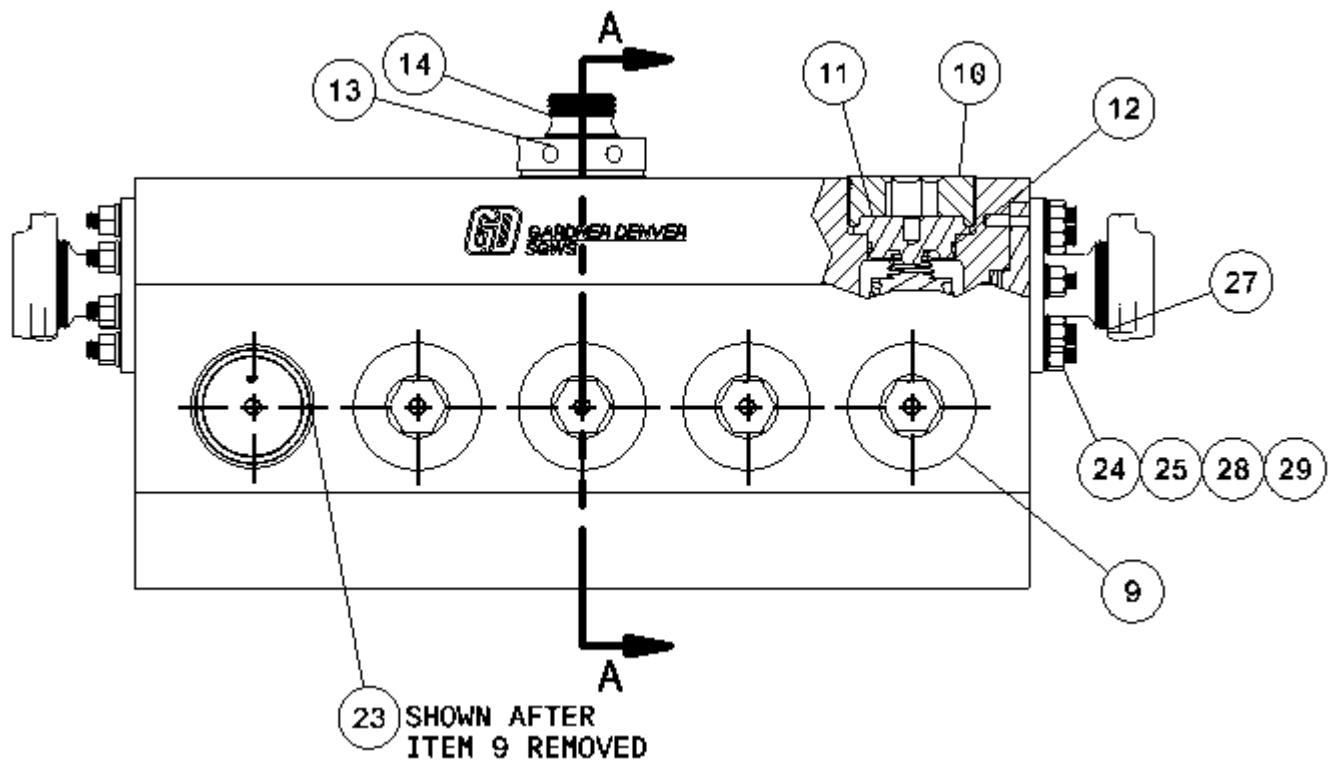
SUPER GWS FLUID CYLINDER FRONT VIEW
